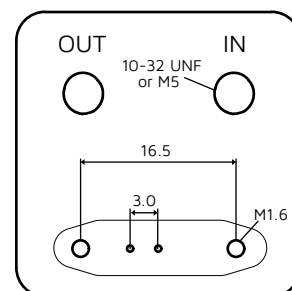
Fluidic adapter with threads cut and indicated fluidic inlet and outlet. All units in mm.
